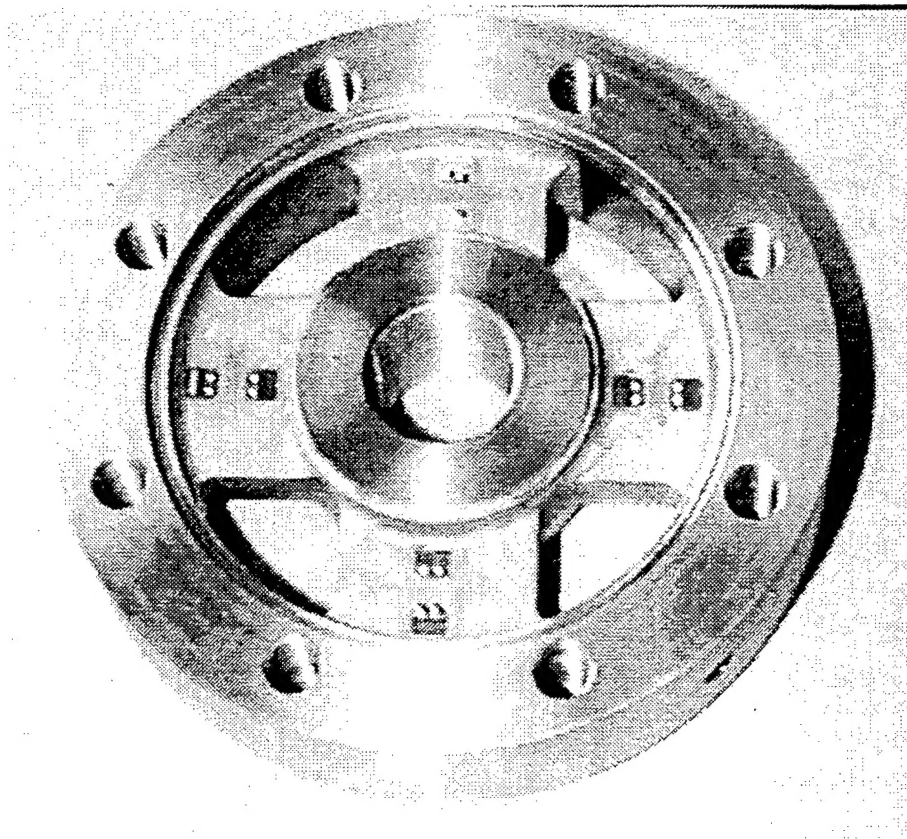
The prototype load cell after machining and testing. To complete it, covers would be welded in place between the inner and outer rings, and the electronics/connector case added. The strain gauges are seen on each web assembly (note top strain gauges are partially missing). The wide webs are to minimize the effects of rope torque on the load cell.
